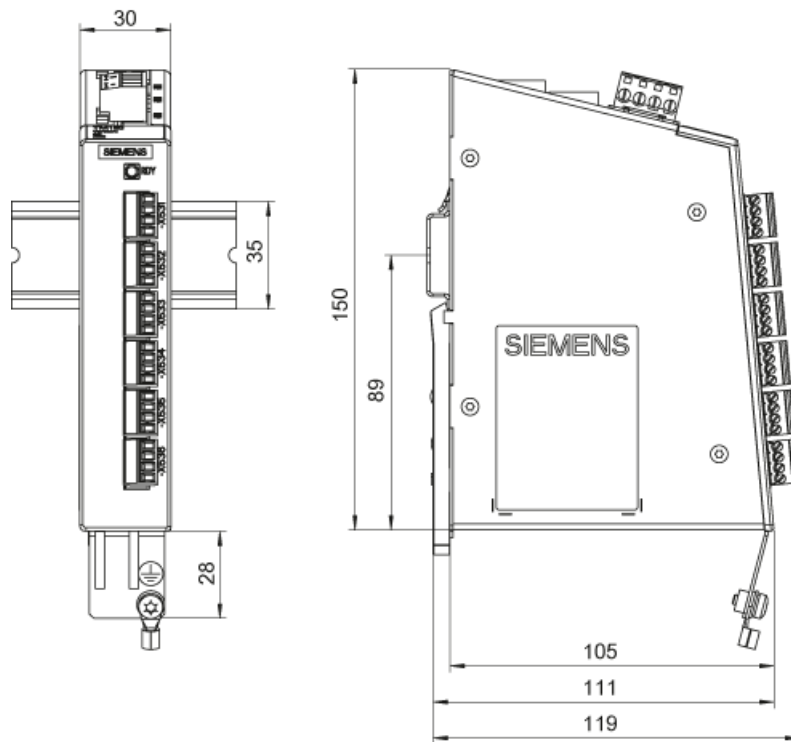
Dimension drawing Terminal Module 150 (TM150)
